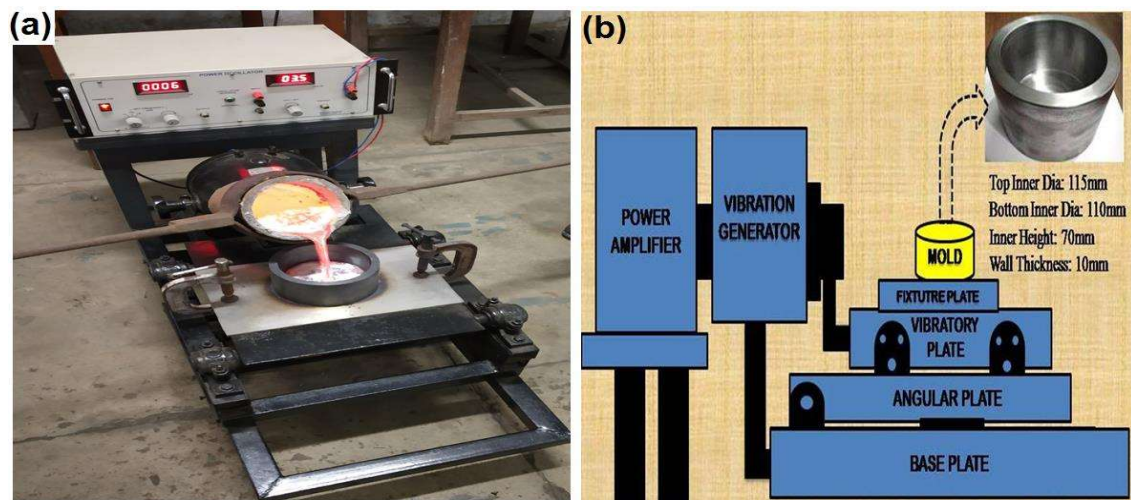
Casting set-up (a) horizontal mechanical vibration M/C and (b) Schematic diagram
